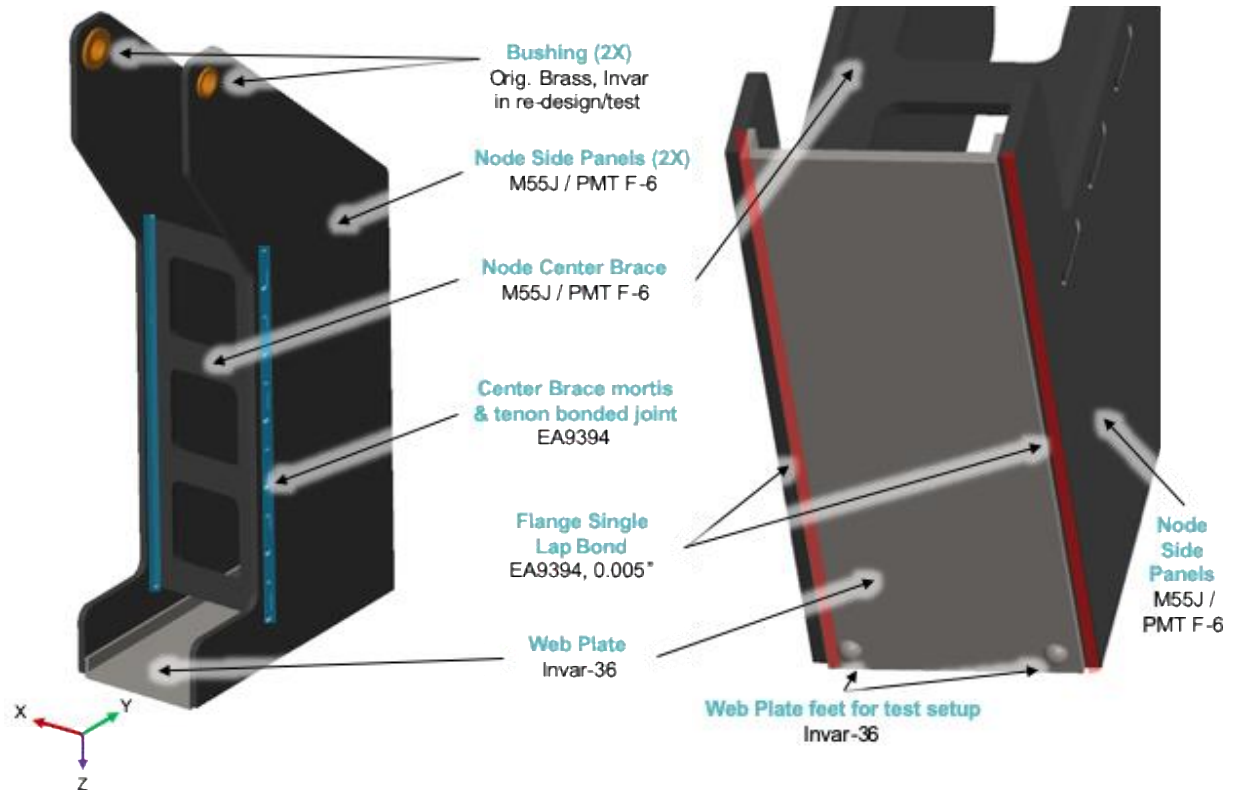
Half-width node assembly prototype detailed design includes all necessary fittings and features to represent the critical dimension of the flight design. The center-brace portion of the prototype was cut out for critical dimension testing, and 4x bushing assemblies were manufactured and tested as well.
